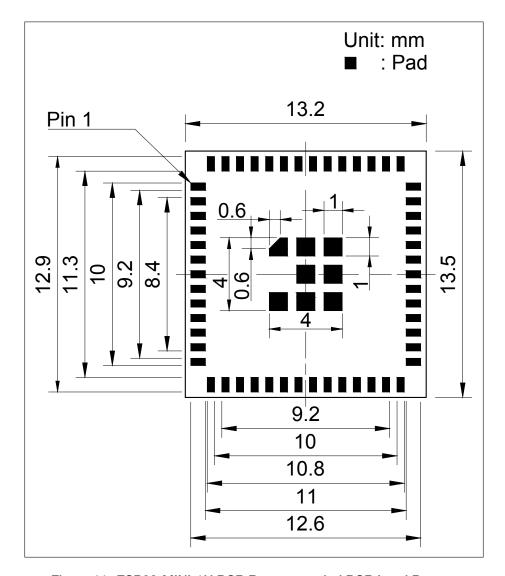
ESP32-MINI-1U PCB Recommended PCB Land Pattern
